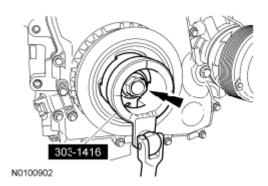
Locating Crankshaft Pulley Bolt Courtesy of FORD MOTOR CO.
